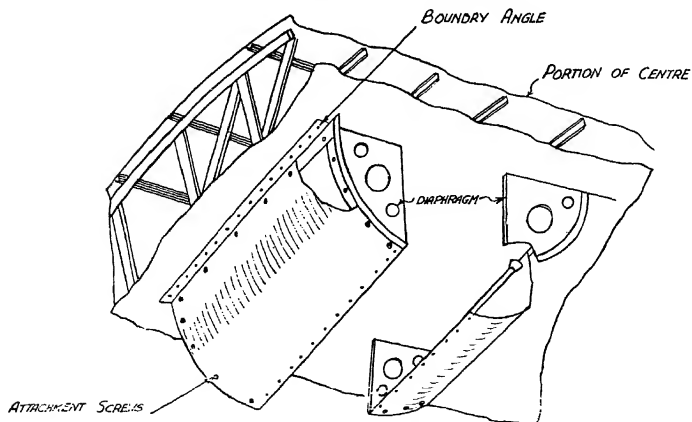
ENGINE COWLING PANEL ASSEMBLY.
